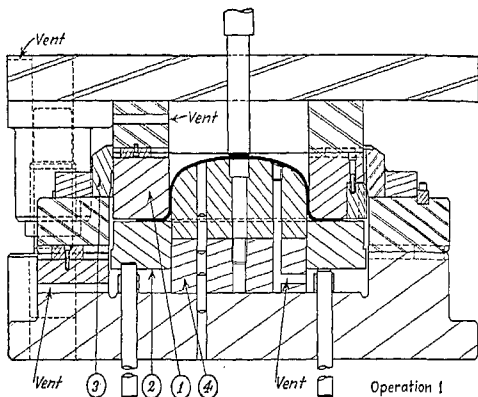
A. Combination cylindrical and elliptical draw die, operation 1. (Right Tool & Die Co.)
